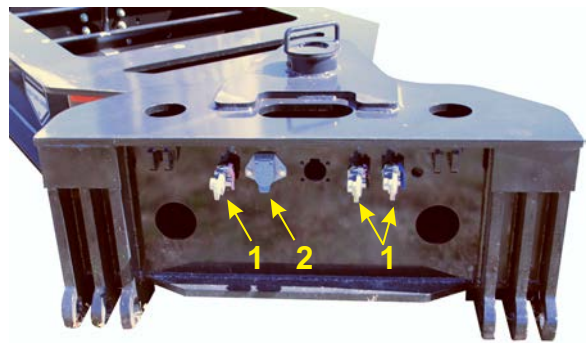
Assemble Spreader Beam to 4<sup>th</sup> Axle
